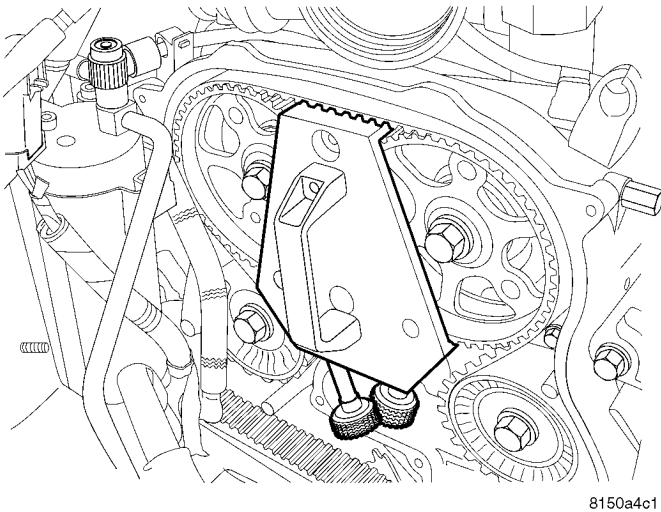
VM.1085 CAMSHAFT LOCKING TOOL
